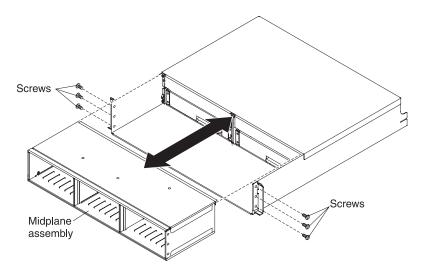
Replacing the midplane assembly in a DS3524 or EXP3524
